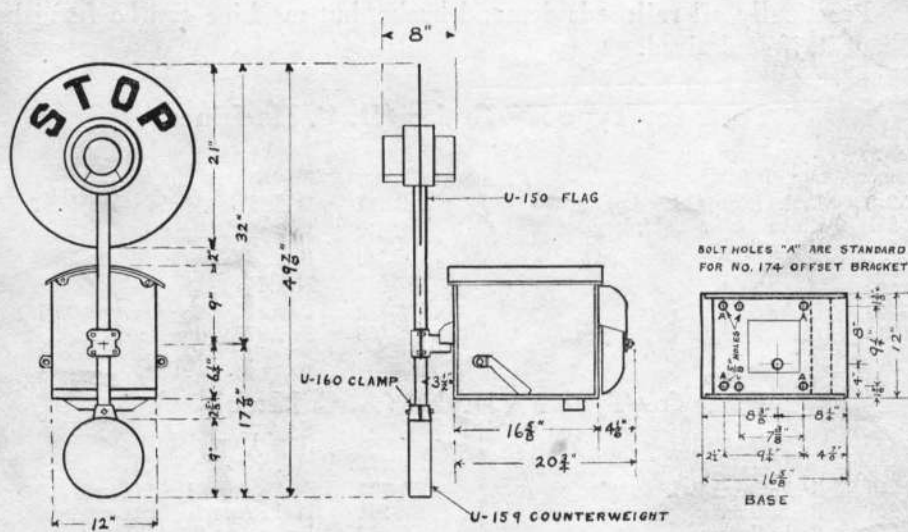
Contact Parts for Magnetic Flagman.
